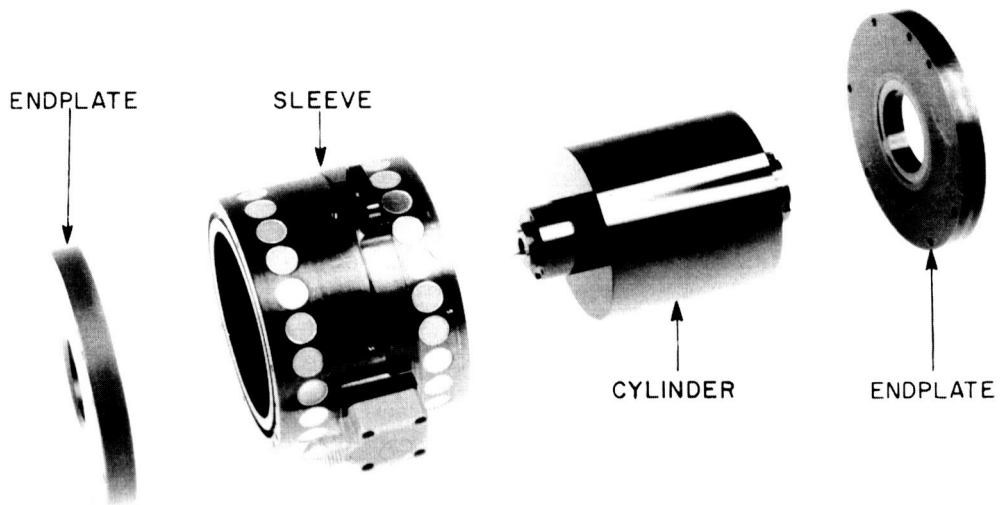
AB5-K8 GAS BEARING ASSEMBLY.
